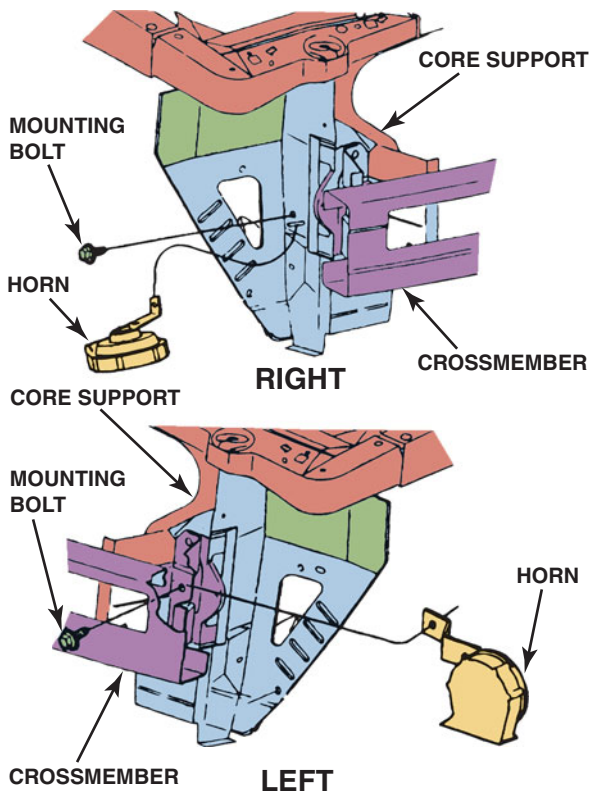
Horns typically mount to the radiator core support or bracket at the front of the vehicle.
